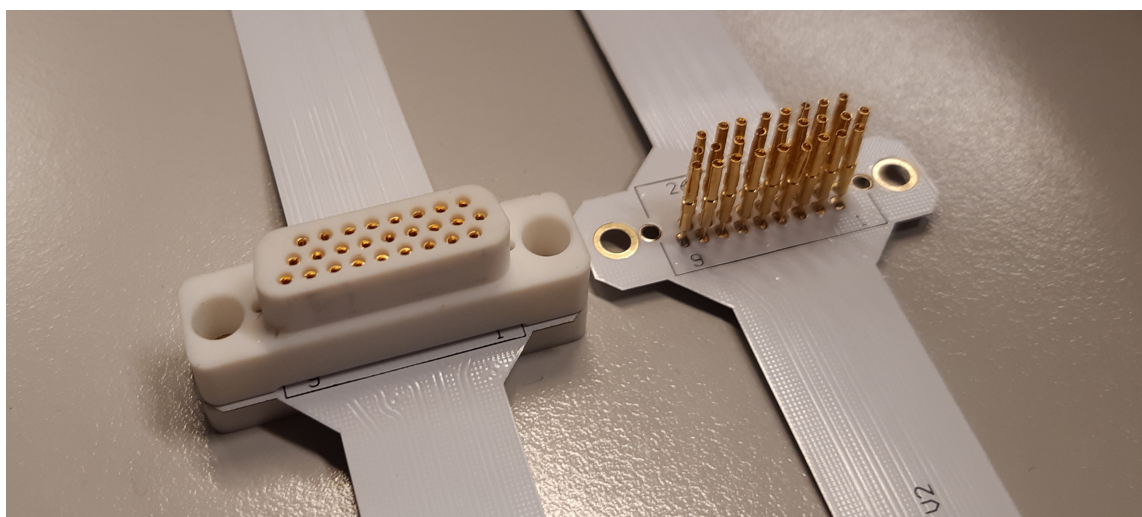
Macor mounting assembly onto a flex PCB. Left - mounted connector. Right - Connector pins soldered directly onto a flex PCB.
